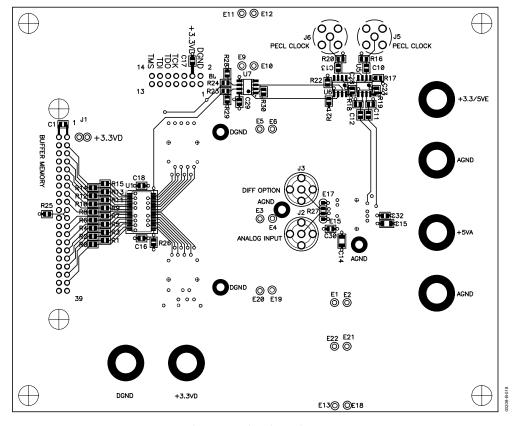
Evaluation Board Mechanical Layout, Bottom View
